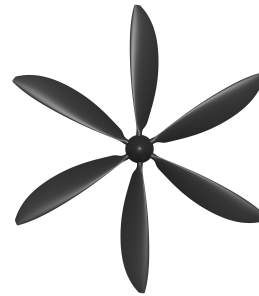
Top view of the optimised propeller geometry in hover condition
